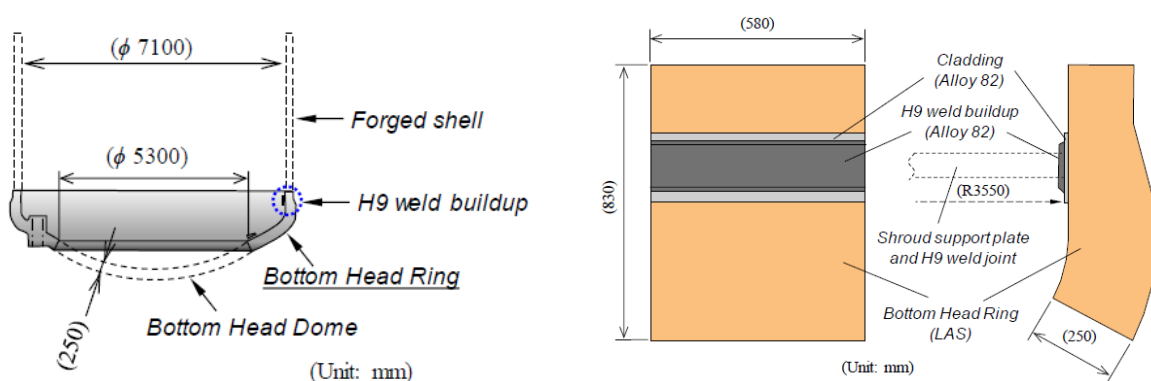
Schematic drawings of RPV bottom head component (left) and test material with H9 weld buildup (right). (referred from Hayashi et al., 2021)
